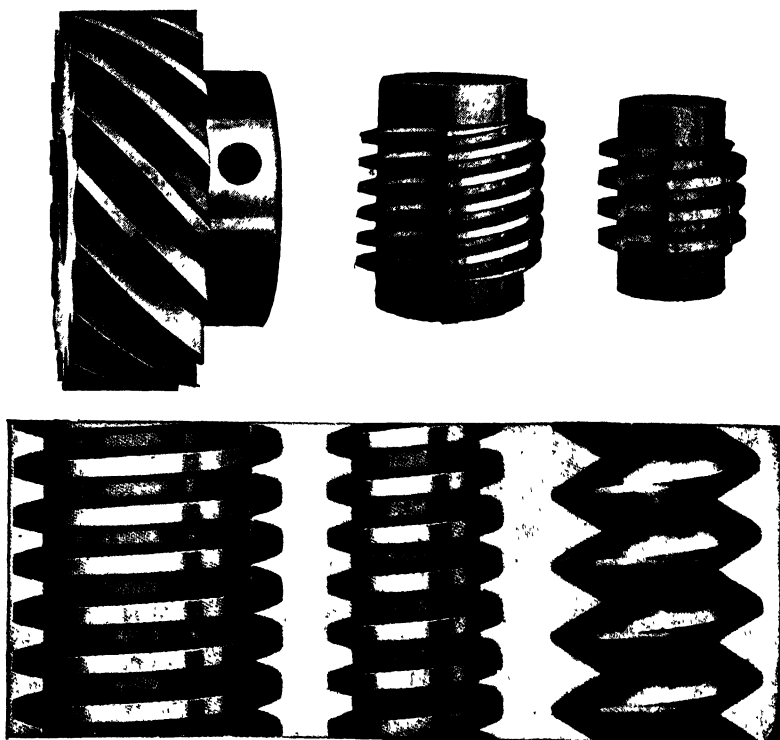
A.—Screws, worms and spiral wheel, examples of milled threads.
